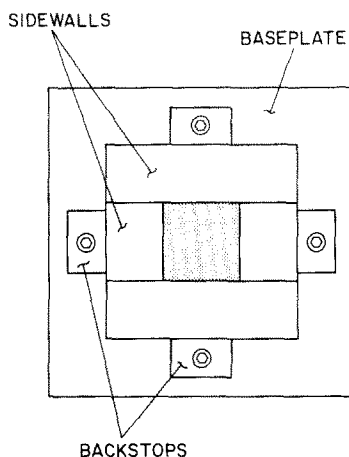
Top view of mold for casting naphthalene modules (the top plate of the mold is not shown).
